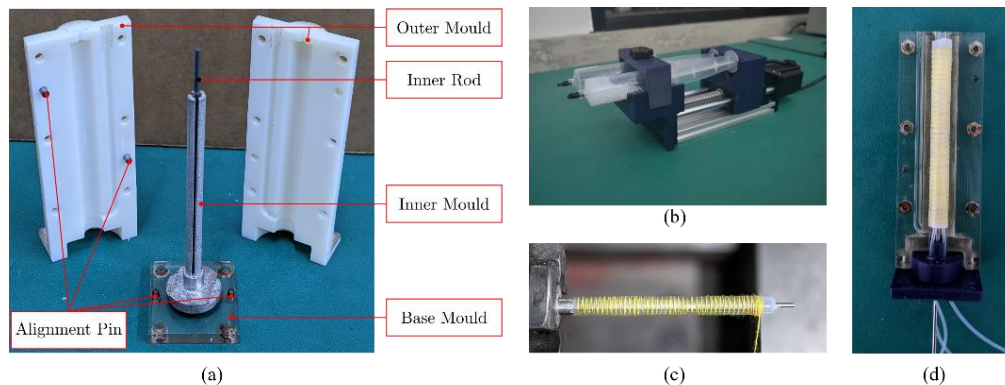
a) Moulds employed to manufacture the prototype; b) syringe pump employed for degassing and injection of silicone-rubber; c) thread winding process using a lathe machine (performed before removing the inner mould); d) the prototype is inserted into the mould and positioned above the silicone injection channel in order to seal the ends of the internal chambers
